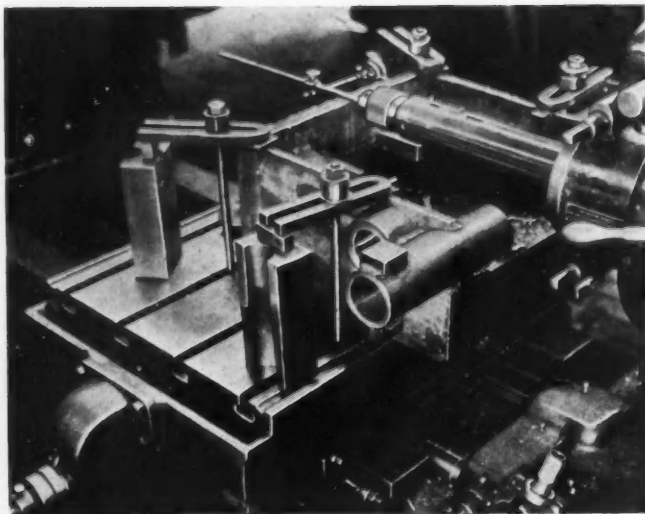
WELDED-STEEL FIXTURE IN PROCESS OF BUILDING
